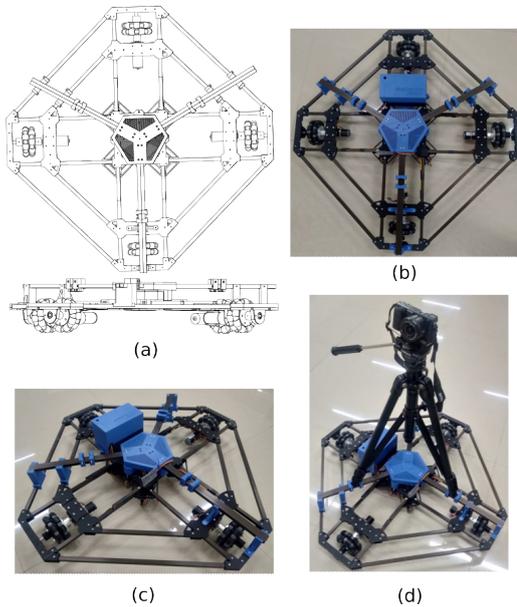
(a) 2D CAD mechanical design, (b) 3D CAD mechanical design, (c) Realistic mechanic chassis, (d) ELDOC with tripod and camera
